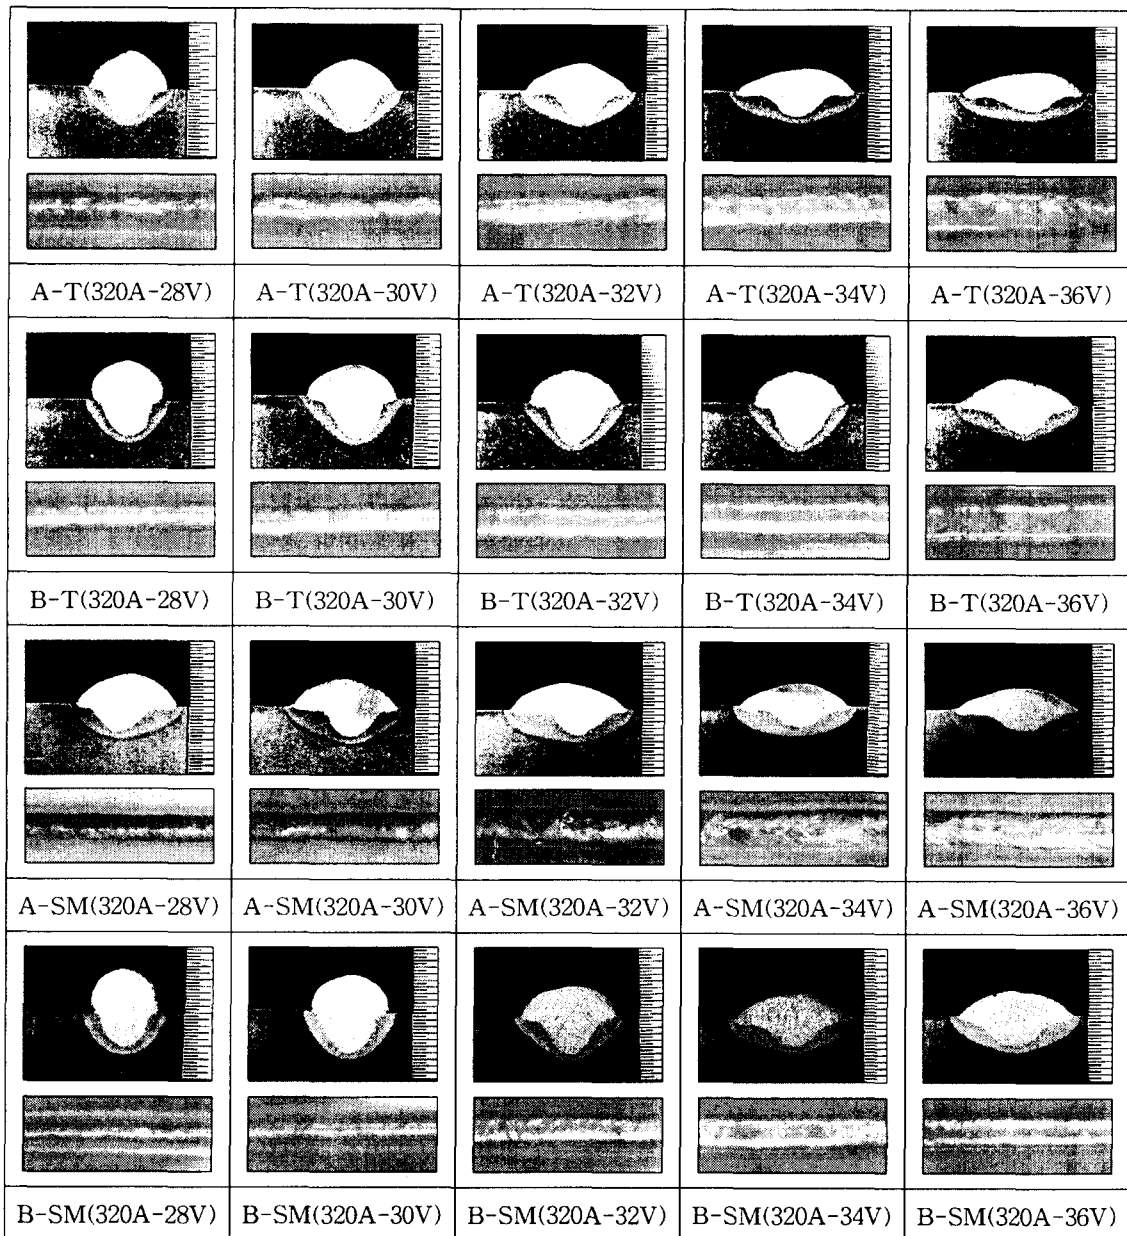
Cross-section of welding bead according to different welding voltage(320A)
